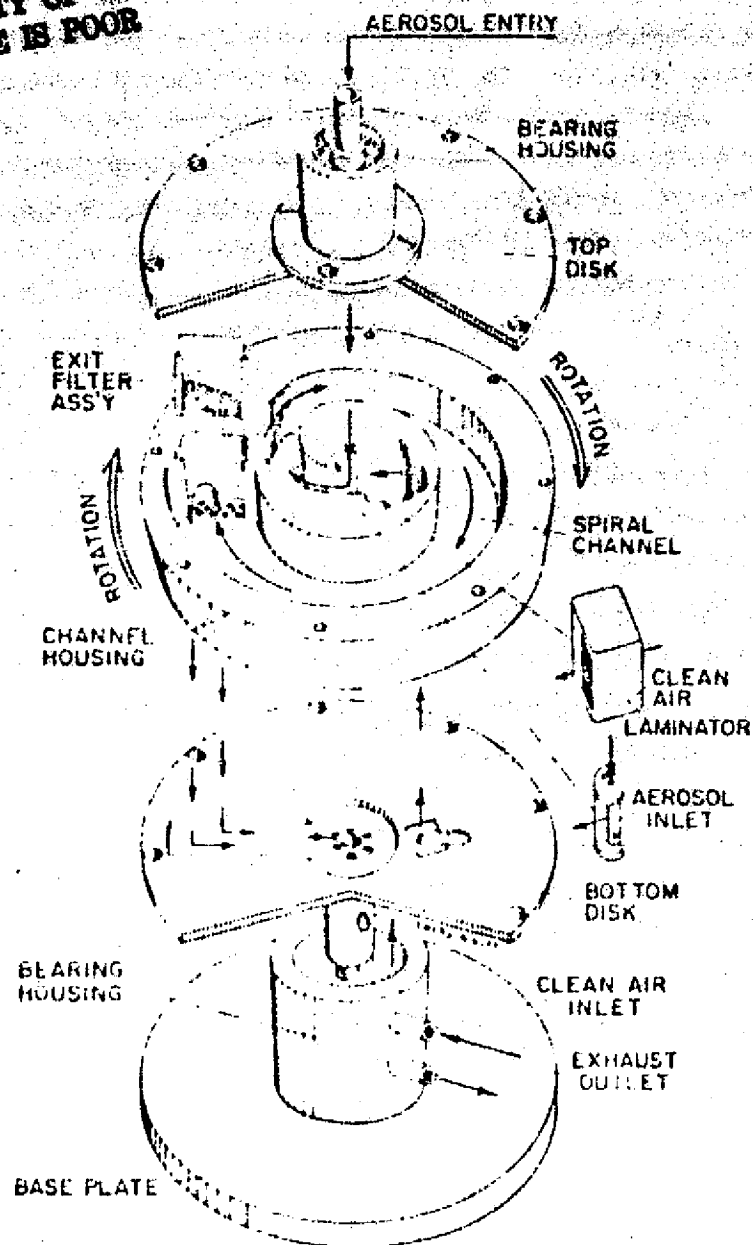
Exploded view of the Lovelace aerosol particle separator.
